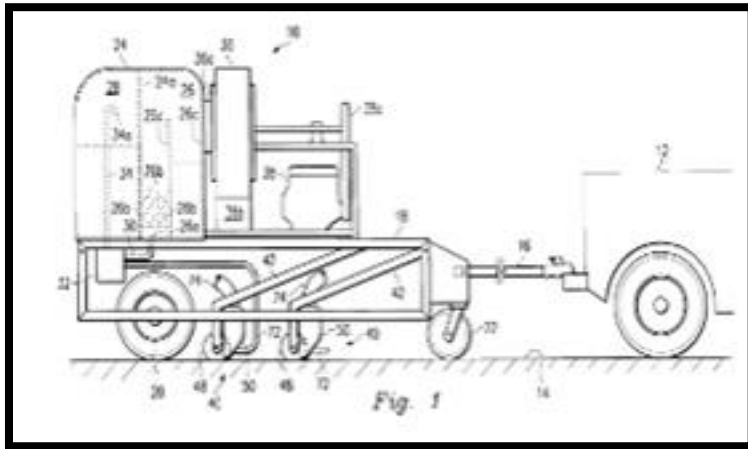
Machine for Removing Water from Outdoor Surfaces
